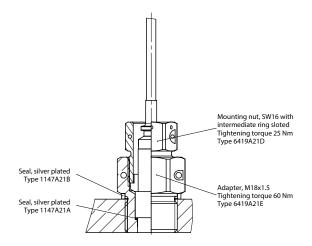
Sensor installation with adapter Type 6419A21E for sensor with 7/16" connector
